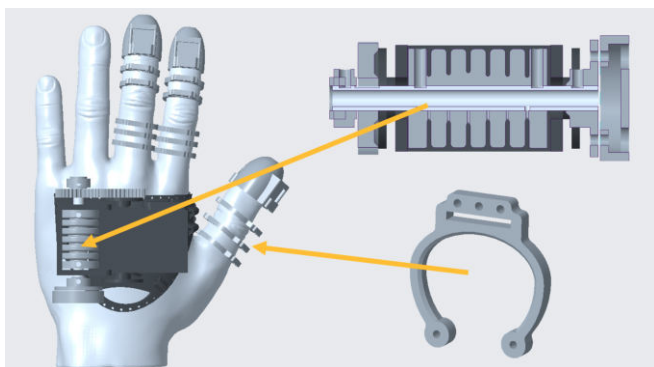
CAD assembly of the components of the prototype. Highlighted the pulley of the actuation unit and an open ring.
